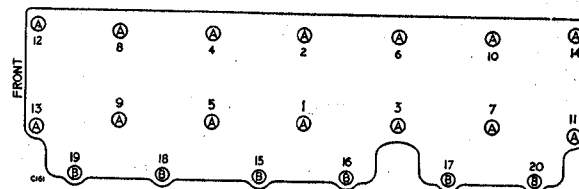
Order of tightening cylinder head bolts. (“75” and “90” models with steel cylinder head gasket)
